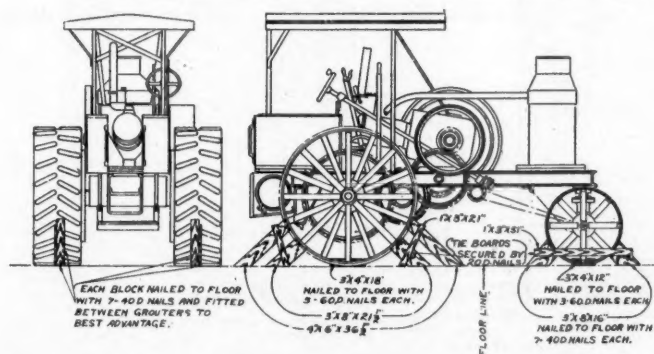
Manner of Loading Gasoline Tractor Engines on Flat Cars
